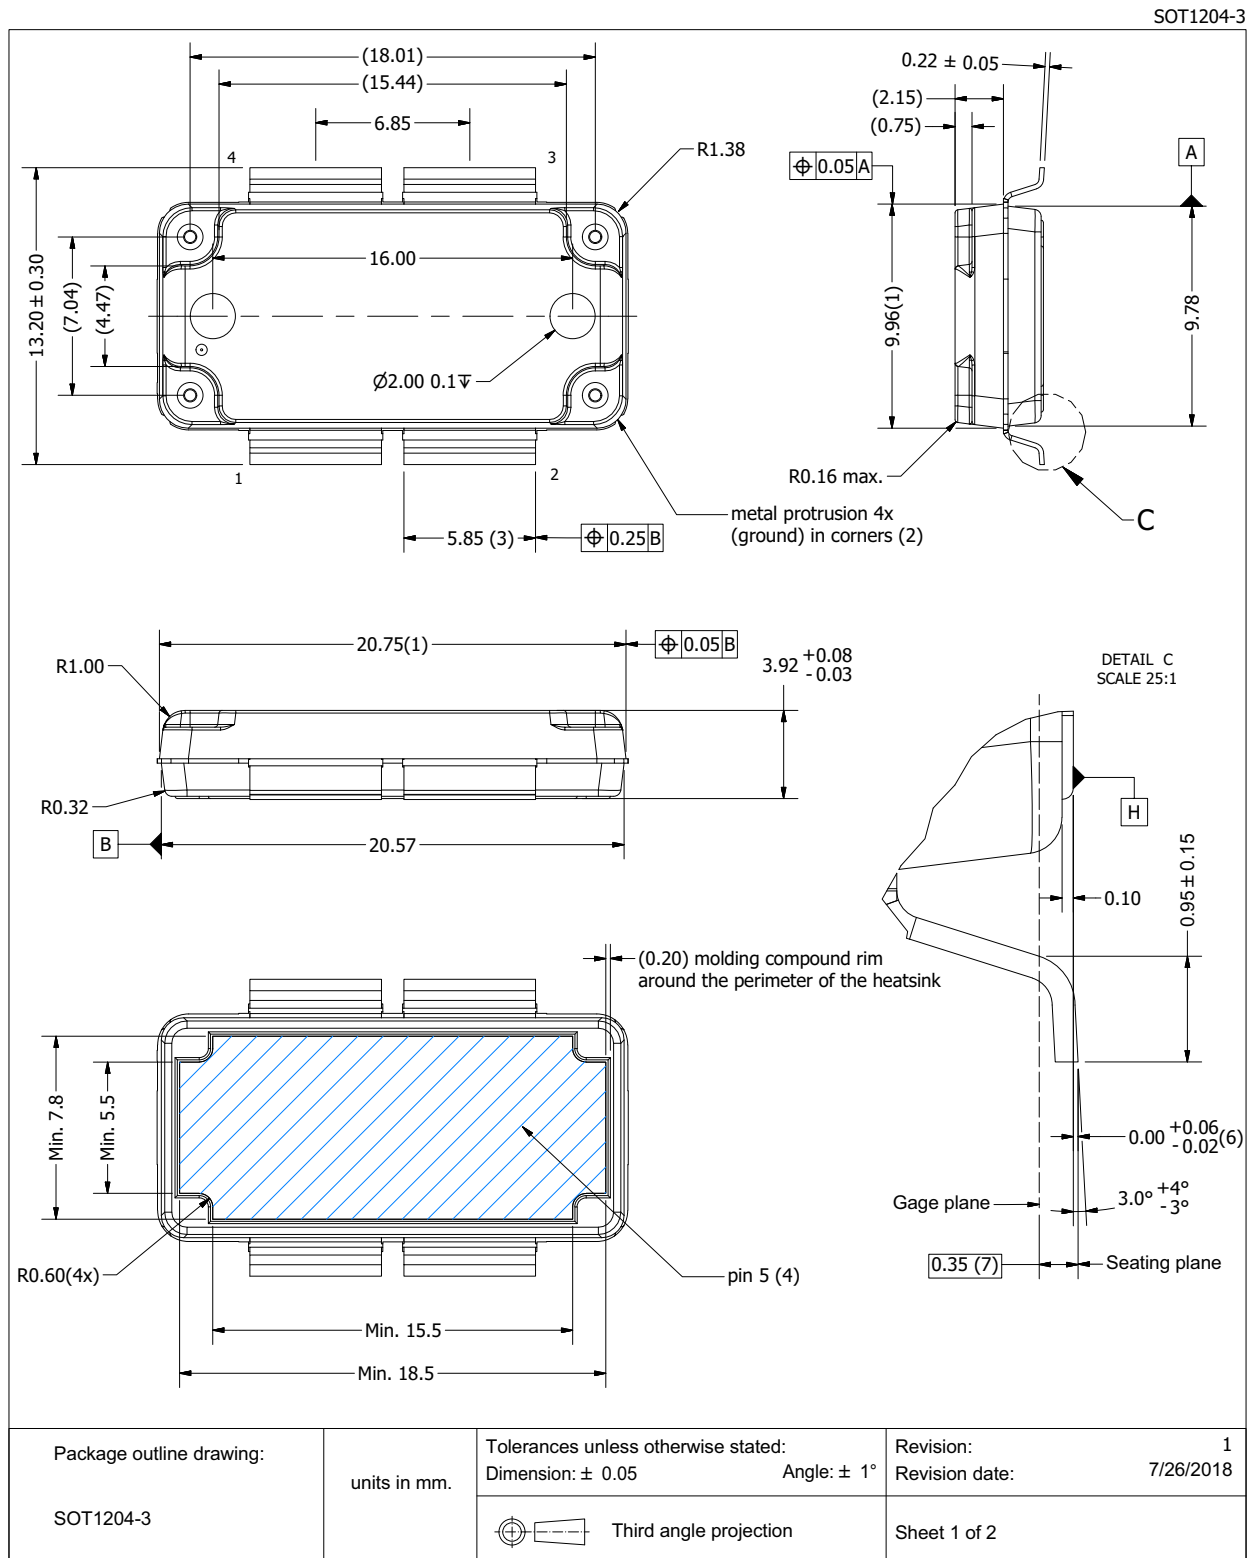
Package outline SOT1204-3 (sheet 1 of 2)
